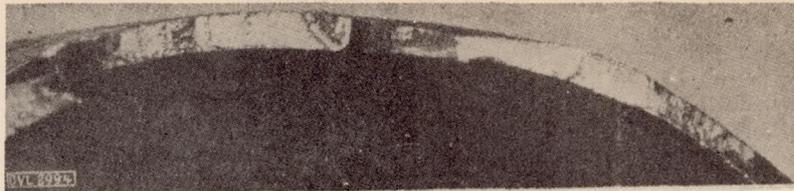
Fatigue fracture of a light-metal tube, starting from a hole.
